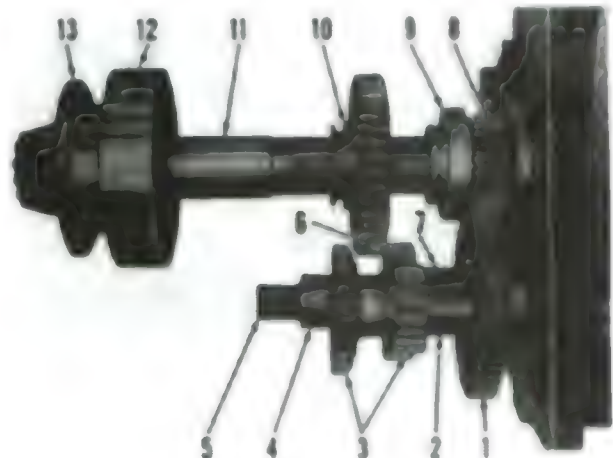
Exploded view of range transmission gears, shafts and bearings used on Models 684, 784 and 884.
